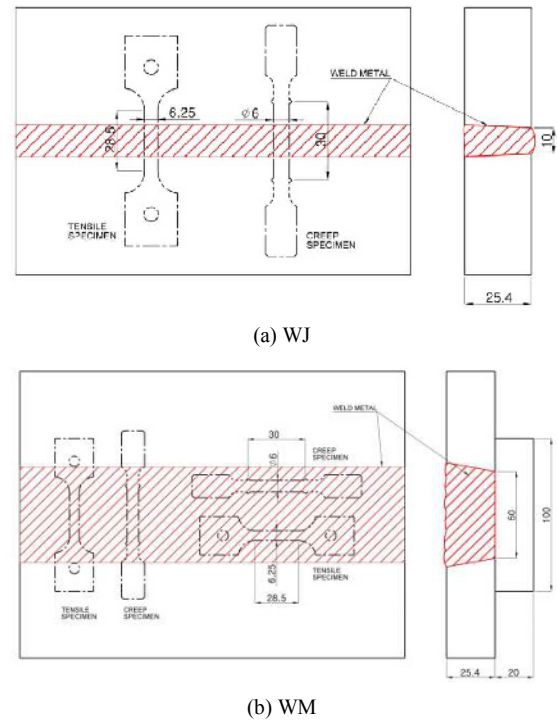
Cutting method of the tensile and creep test specimens for the Alloy 617 weldments.
